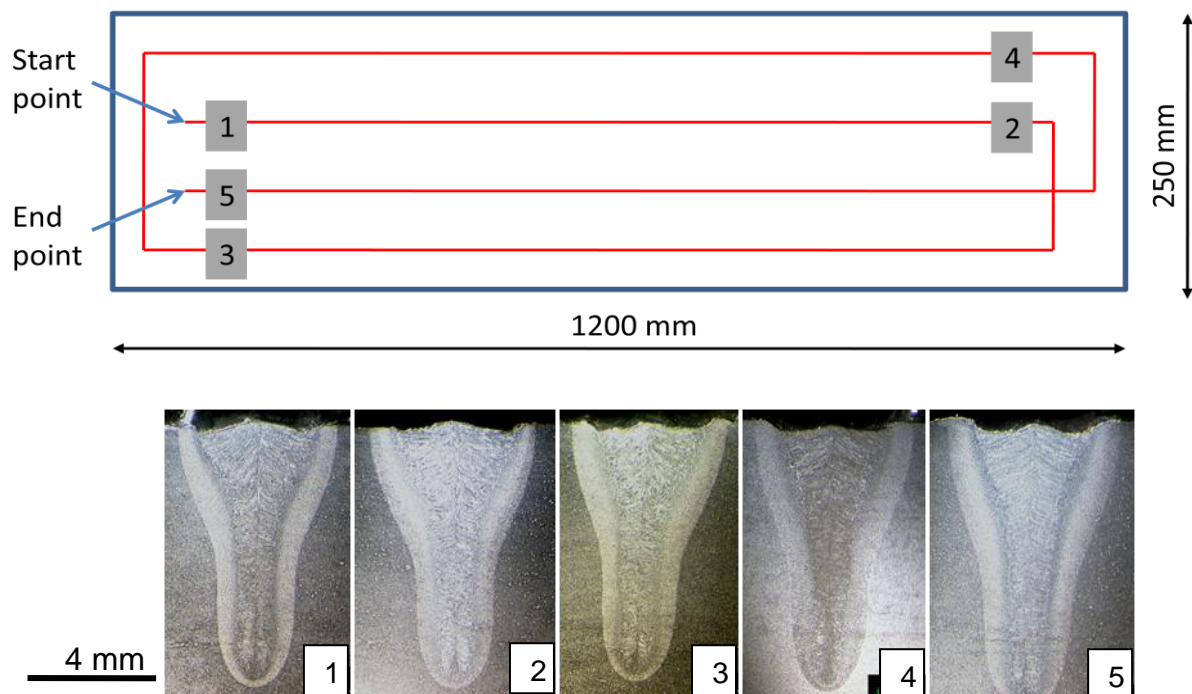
Welding path and macrographs from different sections of long weld achieved at 2 m min^{-1} travel speed and 8 kW of power (welding times: 1 - 2 sec; 2 - 31 sec; 3 - 66 sec; 4 - 103 sec; 5 - 140 sec).
